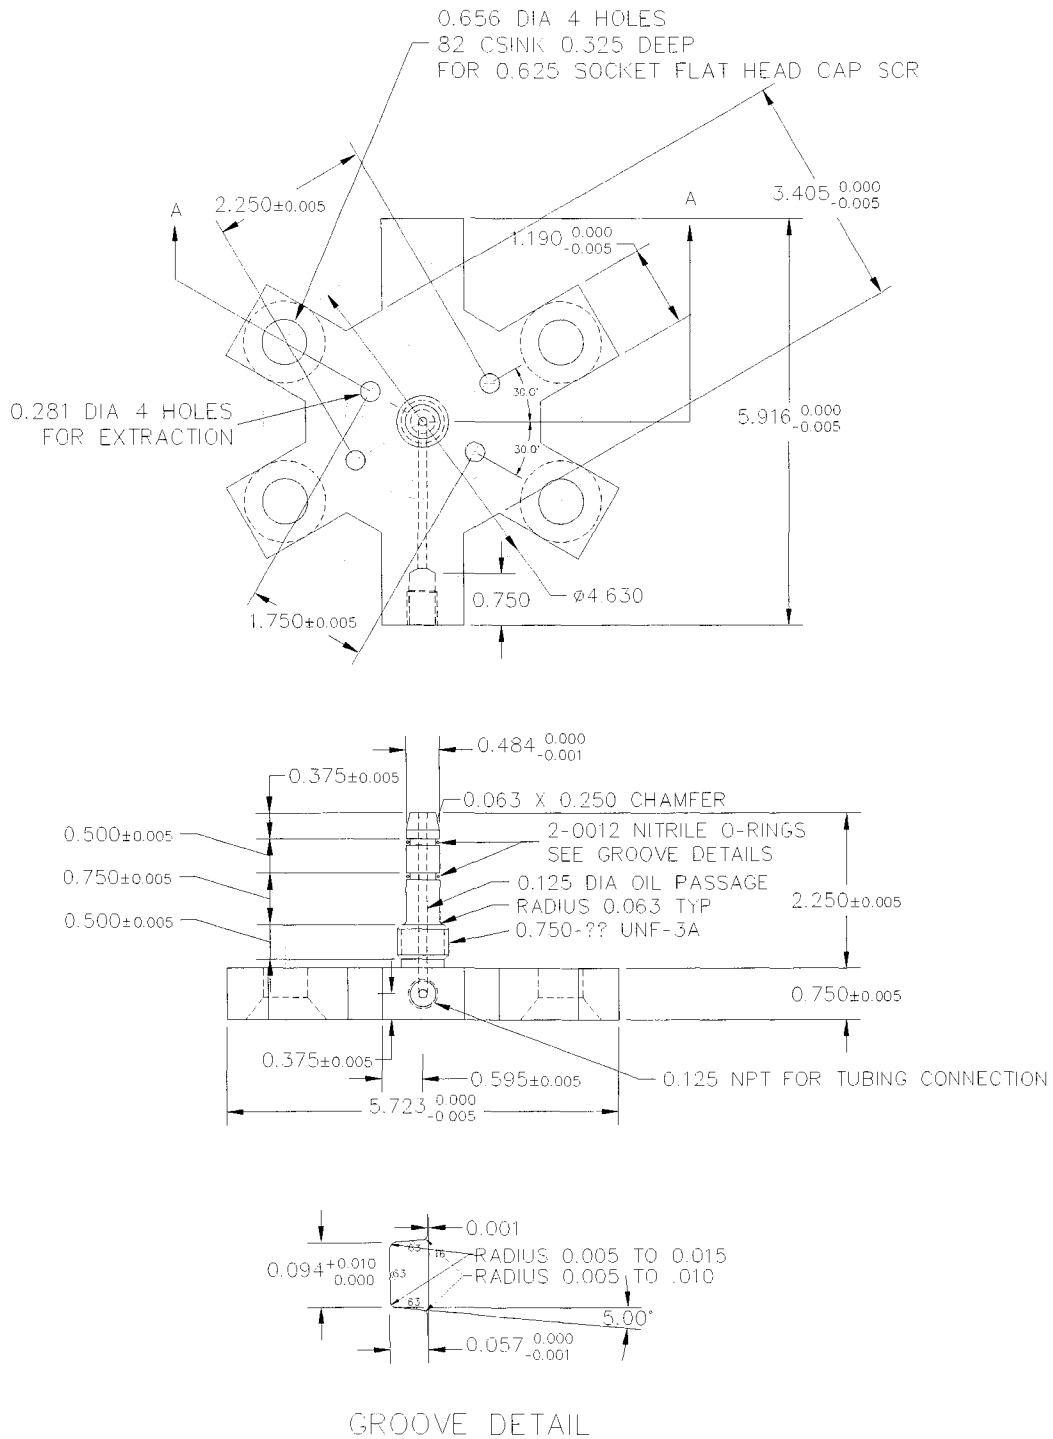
Spoked endplate that receives the plug and bolts to the collar.
